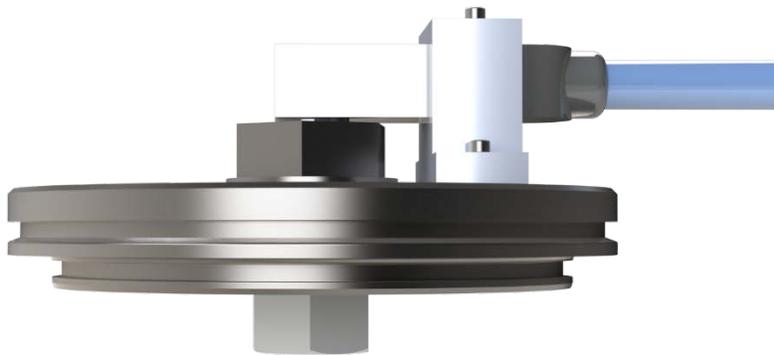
Rendering of the modified KHV Housing Endcap assembly
